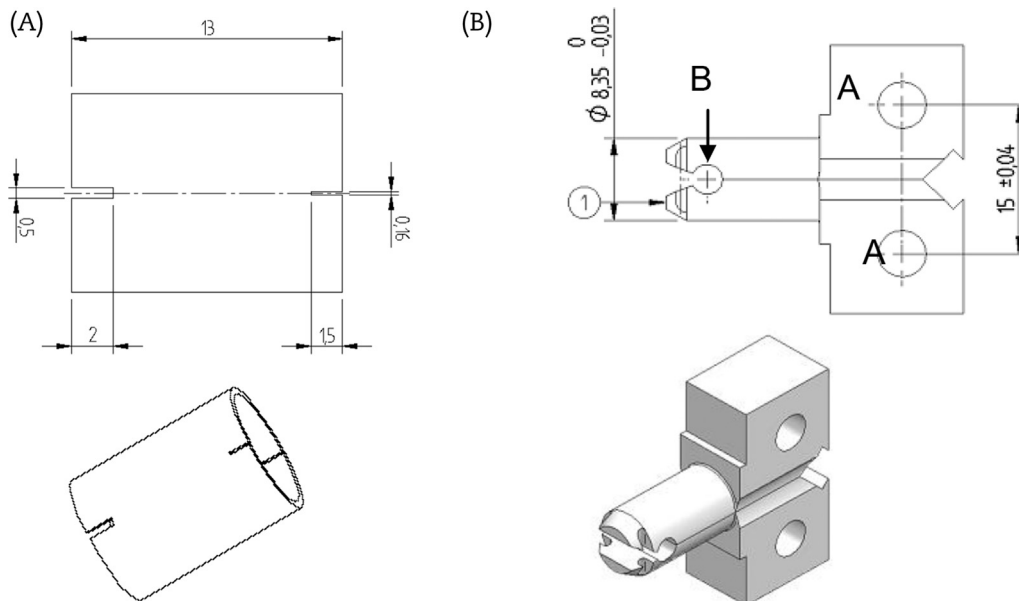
Equipment used in PLT technique. Schematics of the (A) PLT specimen and (B) fixture. PLT, pin-loading tension.
